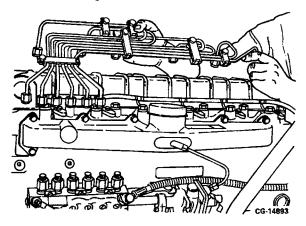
Remove Fuel Injection Lines as an Assembly
